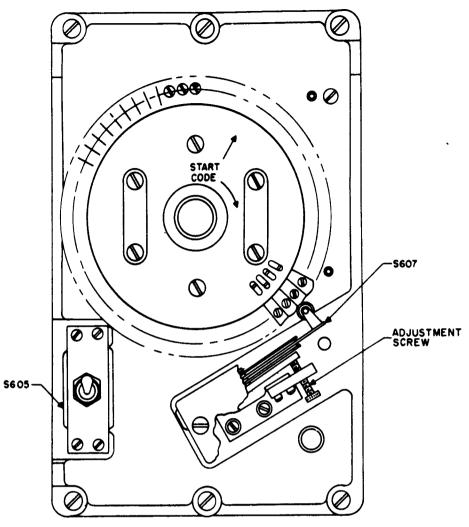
Coder-Indicator Tone Wheel Assembly
